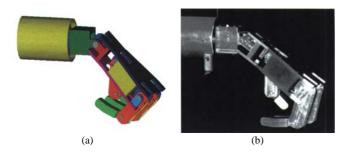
The robot hand and wrist (side view), (a) CAD drawing, and (b) photograph.
